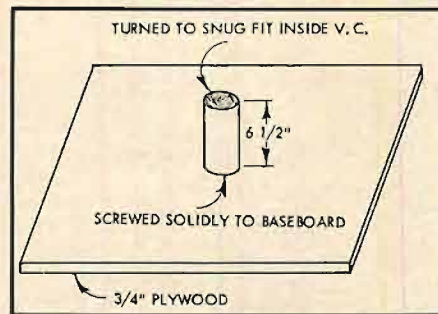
Jig for aligning cone and voice coil. ber thinned with trichloroethane. The outer edge of the Pellon was cemented to an Upson-board ring. A cone assembly is not complete without a device to hold its voice coil centered. Most woofers use flat, corrugated discs. Because their ancestors had legs they are called "spiders." Those available were all too small with too high resonance frequencies. That called for another "roll your own" project.
